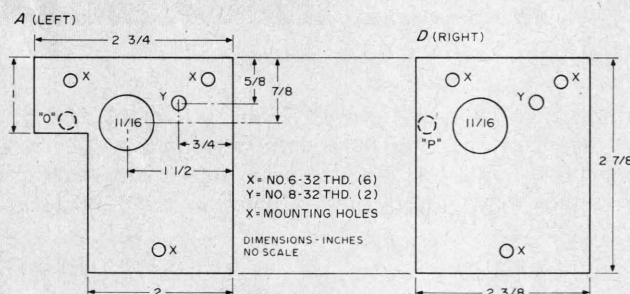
Paper feed supports (3/8" plexiglas). Drill and tap each piece for 8/32 1/4" screw, 3/4" from forward edge, 5/8" from top. Drill 11/16" hole for ball bearing, on each piece 1 1/2" from forward edge, 7/8" from top. O and P: 3/16" diameter holes to a depth of 3/16" on inner surface of each piece, 7/8" from top, 2 1/4" from forward edge, to retain 3/16" smoothing and aligning rod (brass, 3/16" x 12 1/4").
